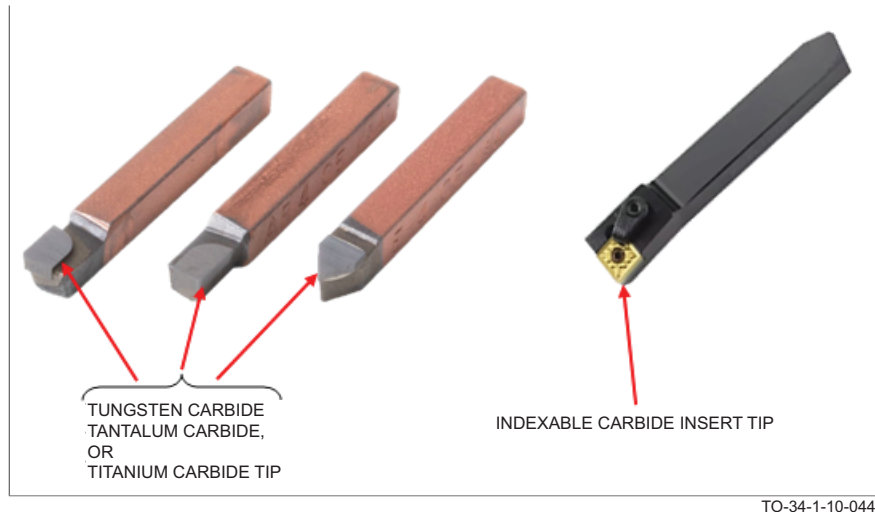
Tipped and Indexable Insert Carbide Cutting Bits
